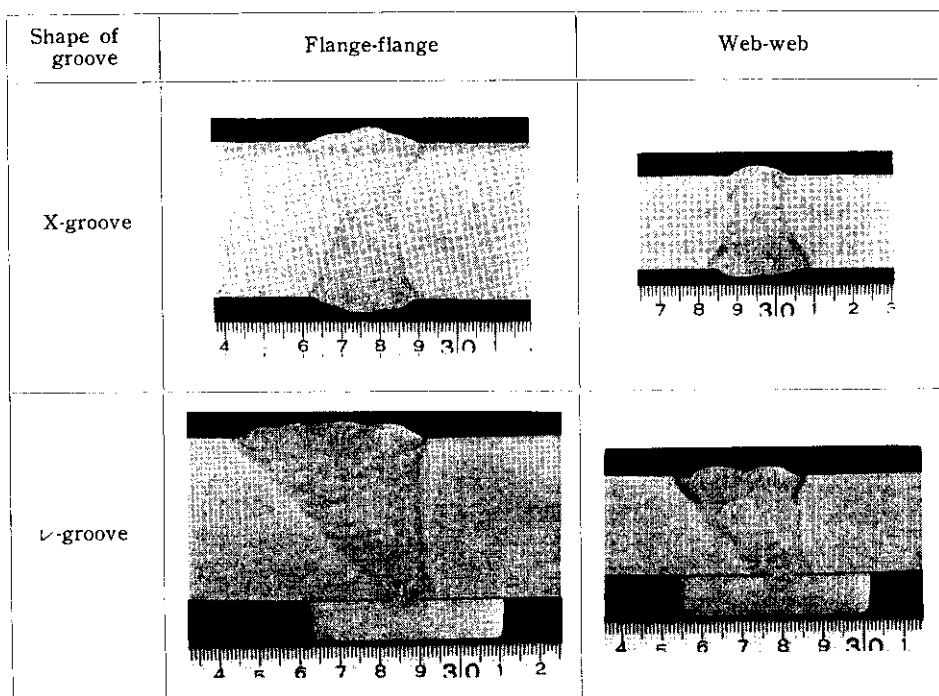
Macrostructures of butt welded joint (Covered arc welding)
